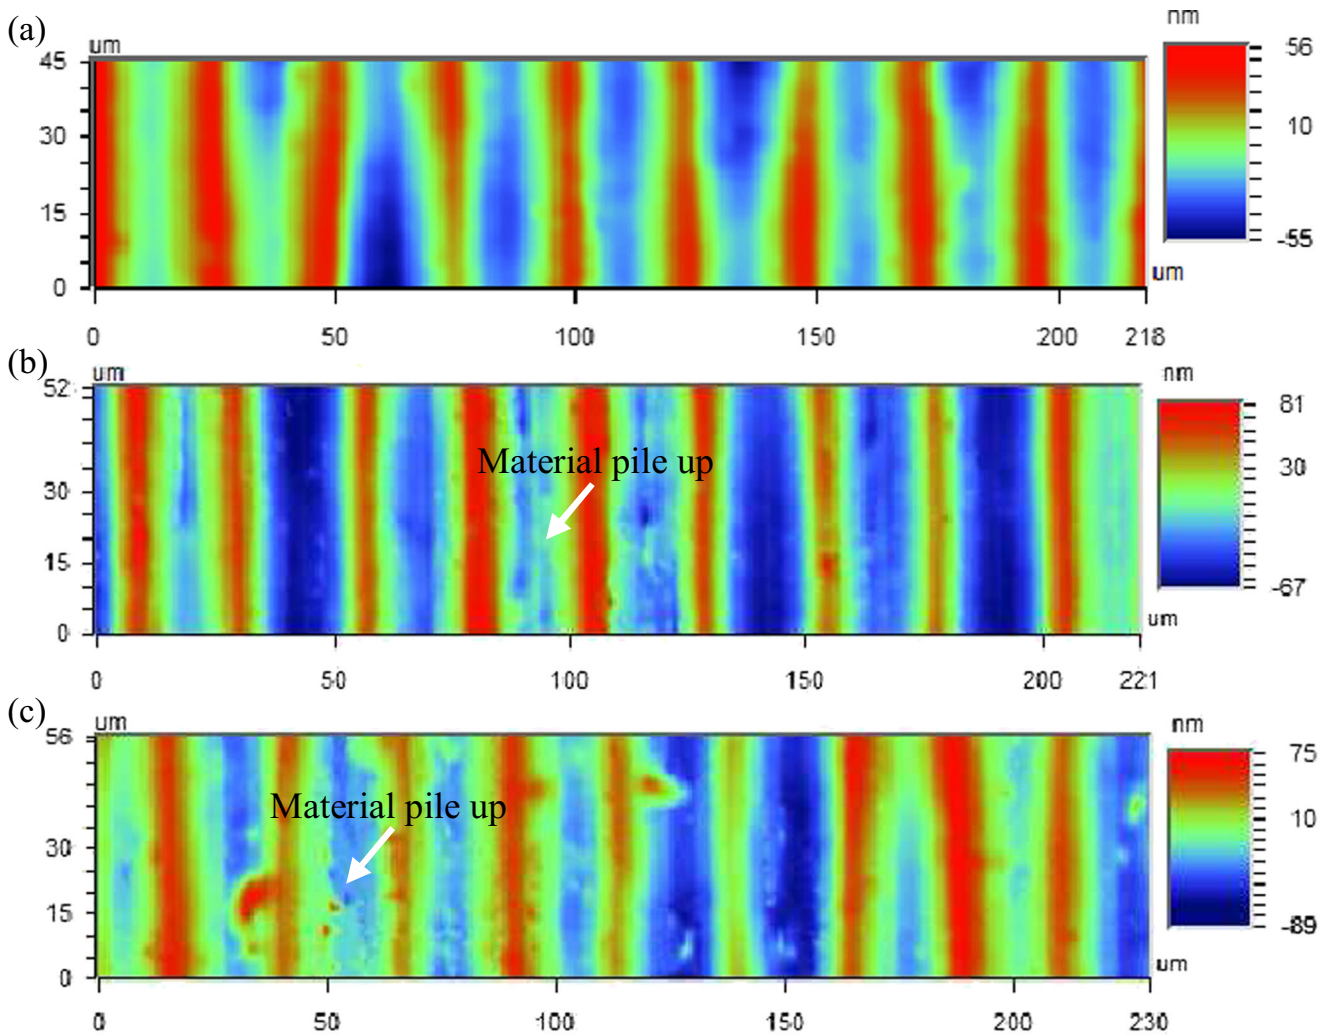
Surface topography at the cutting distances of a 1000 m, b 3000 m, and c 5000 m. The *white arrows* are used to point out the material pile up on the machined surface
